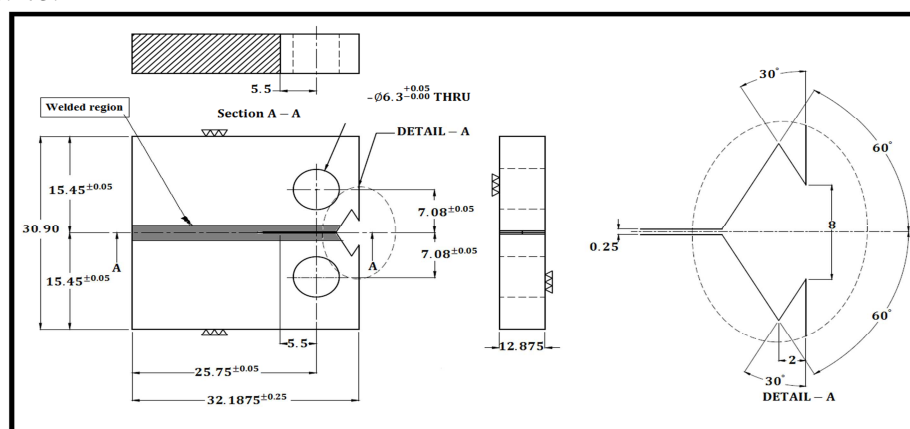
Dimensions of CT specimen as per ASTM E-399 standard used for K_{IC} test (All dimensions are in mm)
